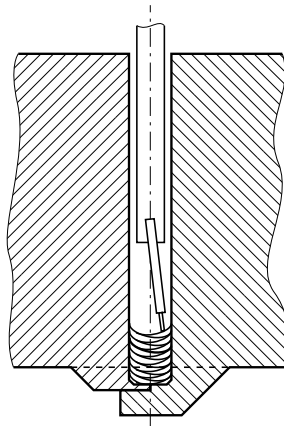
Sketch of a narrow gap weld
